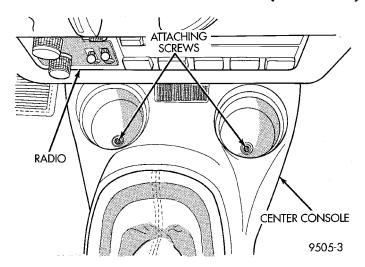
Attaching Screws At Front Of Center Console Warning: The Auto adjusting feature of this parking brake lever assembly contains a clock spring loaded to approximately 20 pounds. Do not release the Auto adjuster lockout device before installing cables into the equalizer. Keep hands out of auto adjuster sector and pawl area. Failure to observe caution in handling this mechanism could lead to serious injury.
